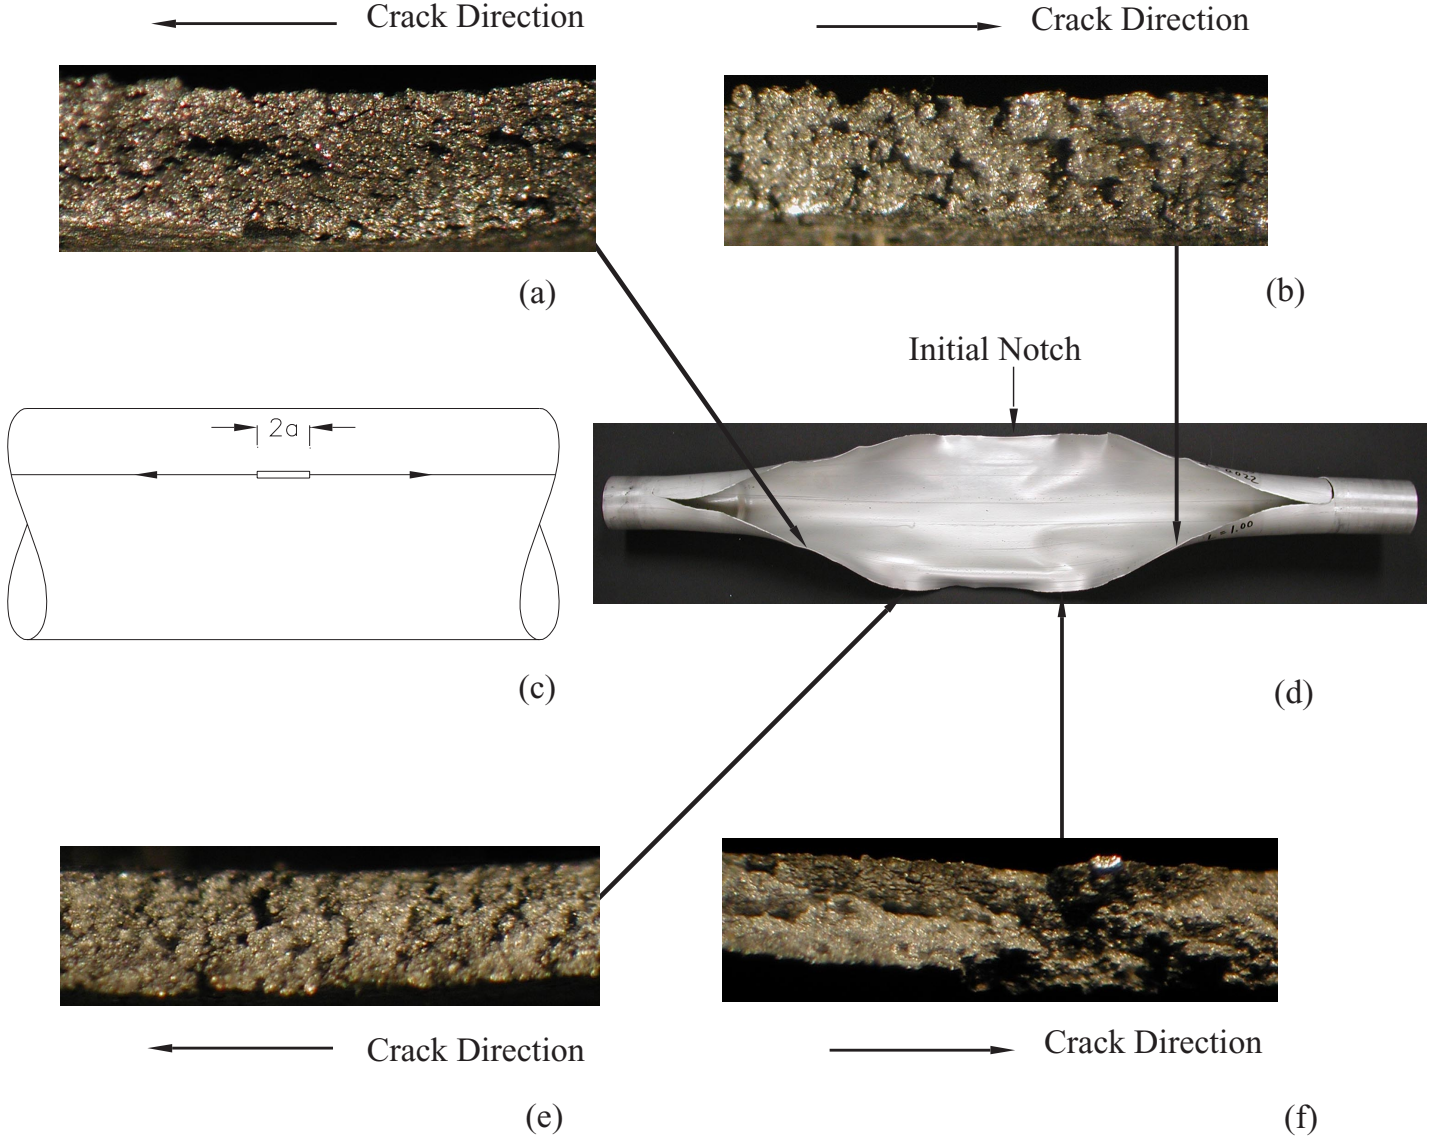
Fractographs, post-test specimen, and crack path schematic for a tube fractured under gaseous nitrogen loading.
